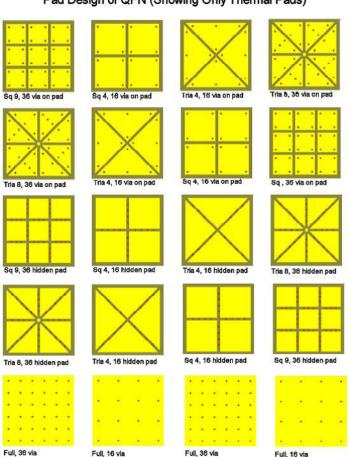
Pad design of the QFN test board, showing only thermal pad patterns.
